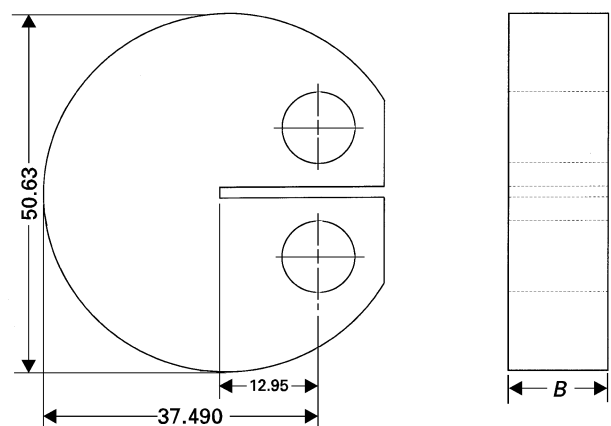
Geometry of the compact tension DC(T) specimen used for cyclic fatigue–crack growth and fracture toughness tests.
